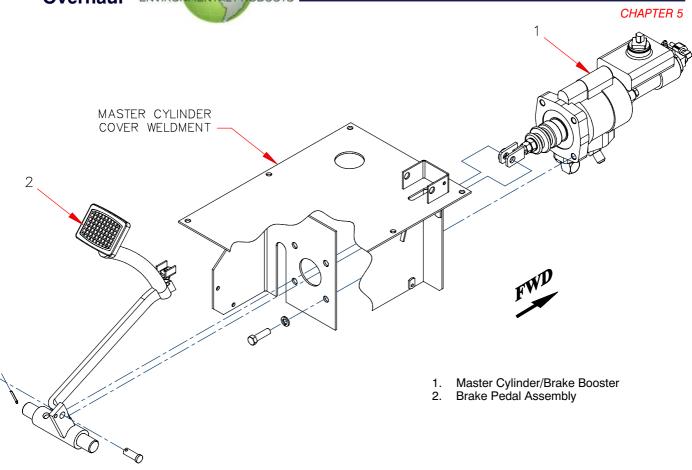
A Master Cylinder/Brake Booster Removal/Installation
